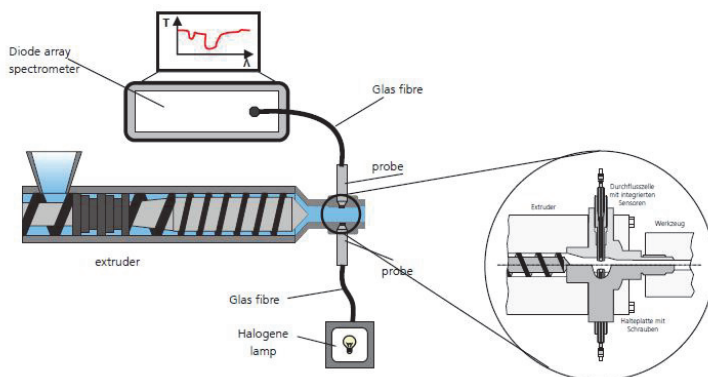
Drawing of the extruder equipped with probes for transmission measurement. The probes were installed in an adapter at the extruder die.
